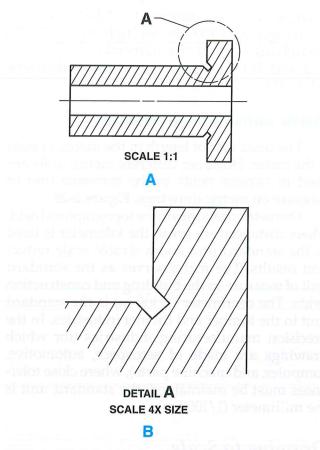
Drawing an object to scale. A—Shown is a drawing made to scale at full size. B—A feature of the part is enlarged to show detail. The detail is drawn at 4:1 (4X) scale.
